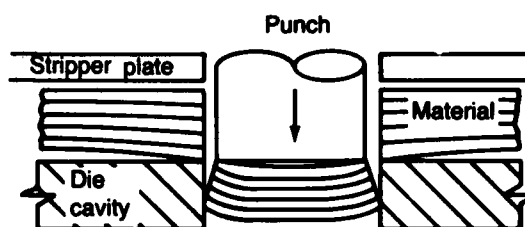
Cross-sectional view of precision stamping and die fabricating a part.
